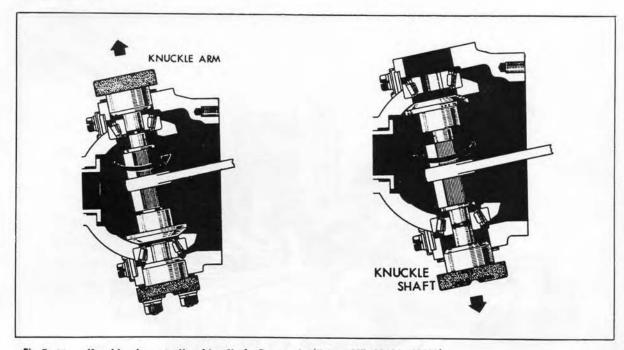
Knuckle Arm & Knuckle Shaft Removal (Using SST 09606-60010)
